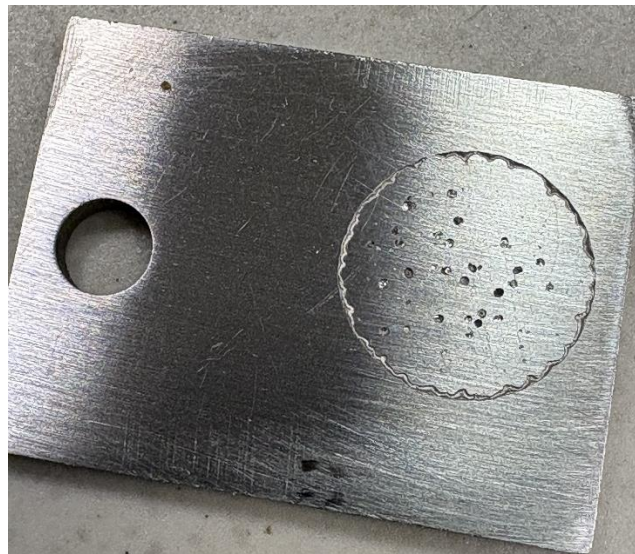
Pitting and crevice corrosion on the metal surface
